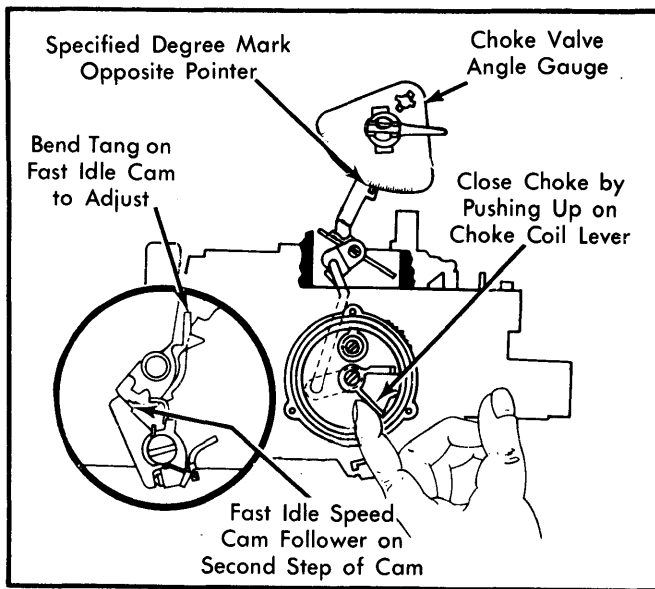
Adjusting Choke Rod (Fast Idle Cam)
